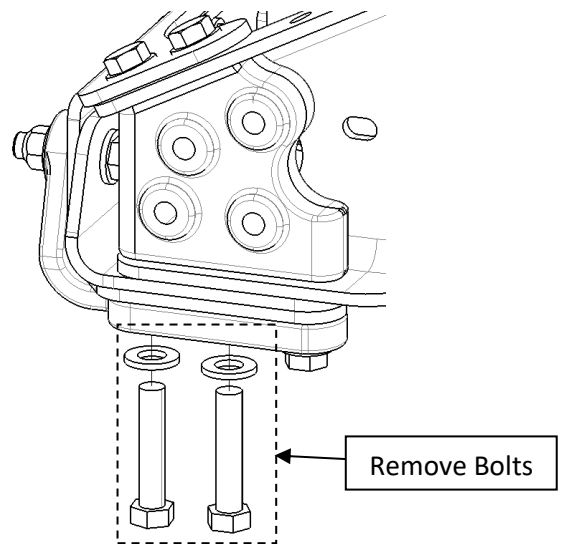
Truck Frame Bolt Removal (Driver Side Shown).
